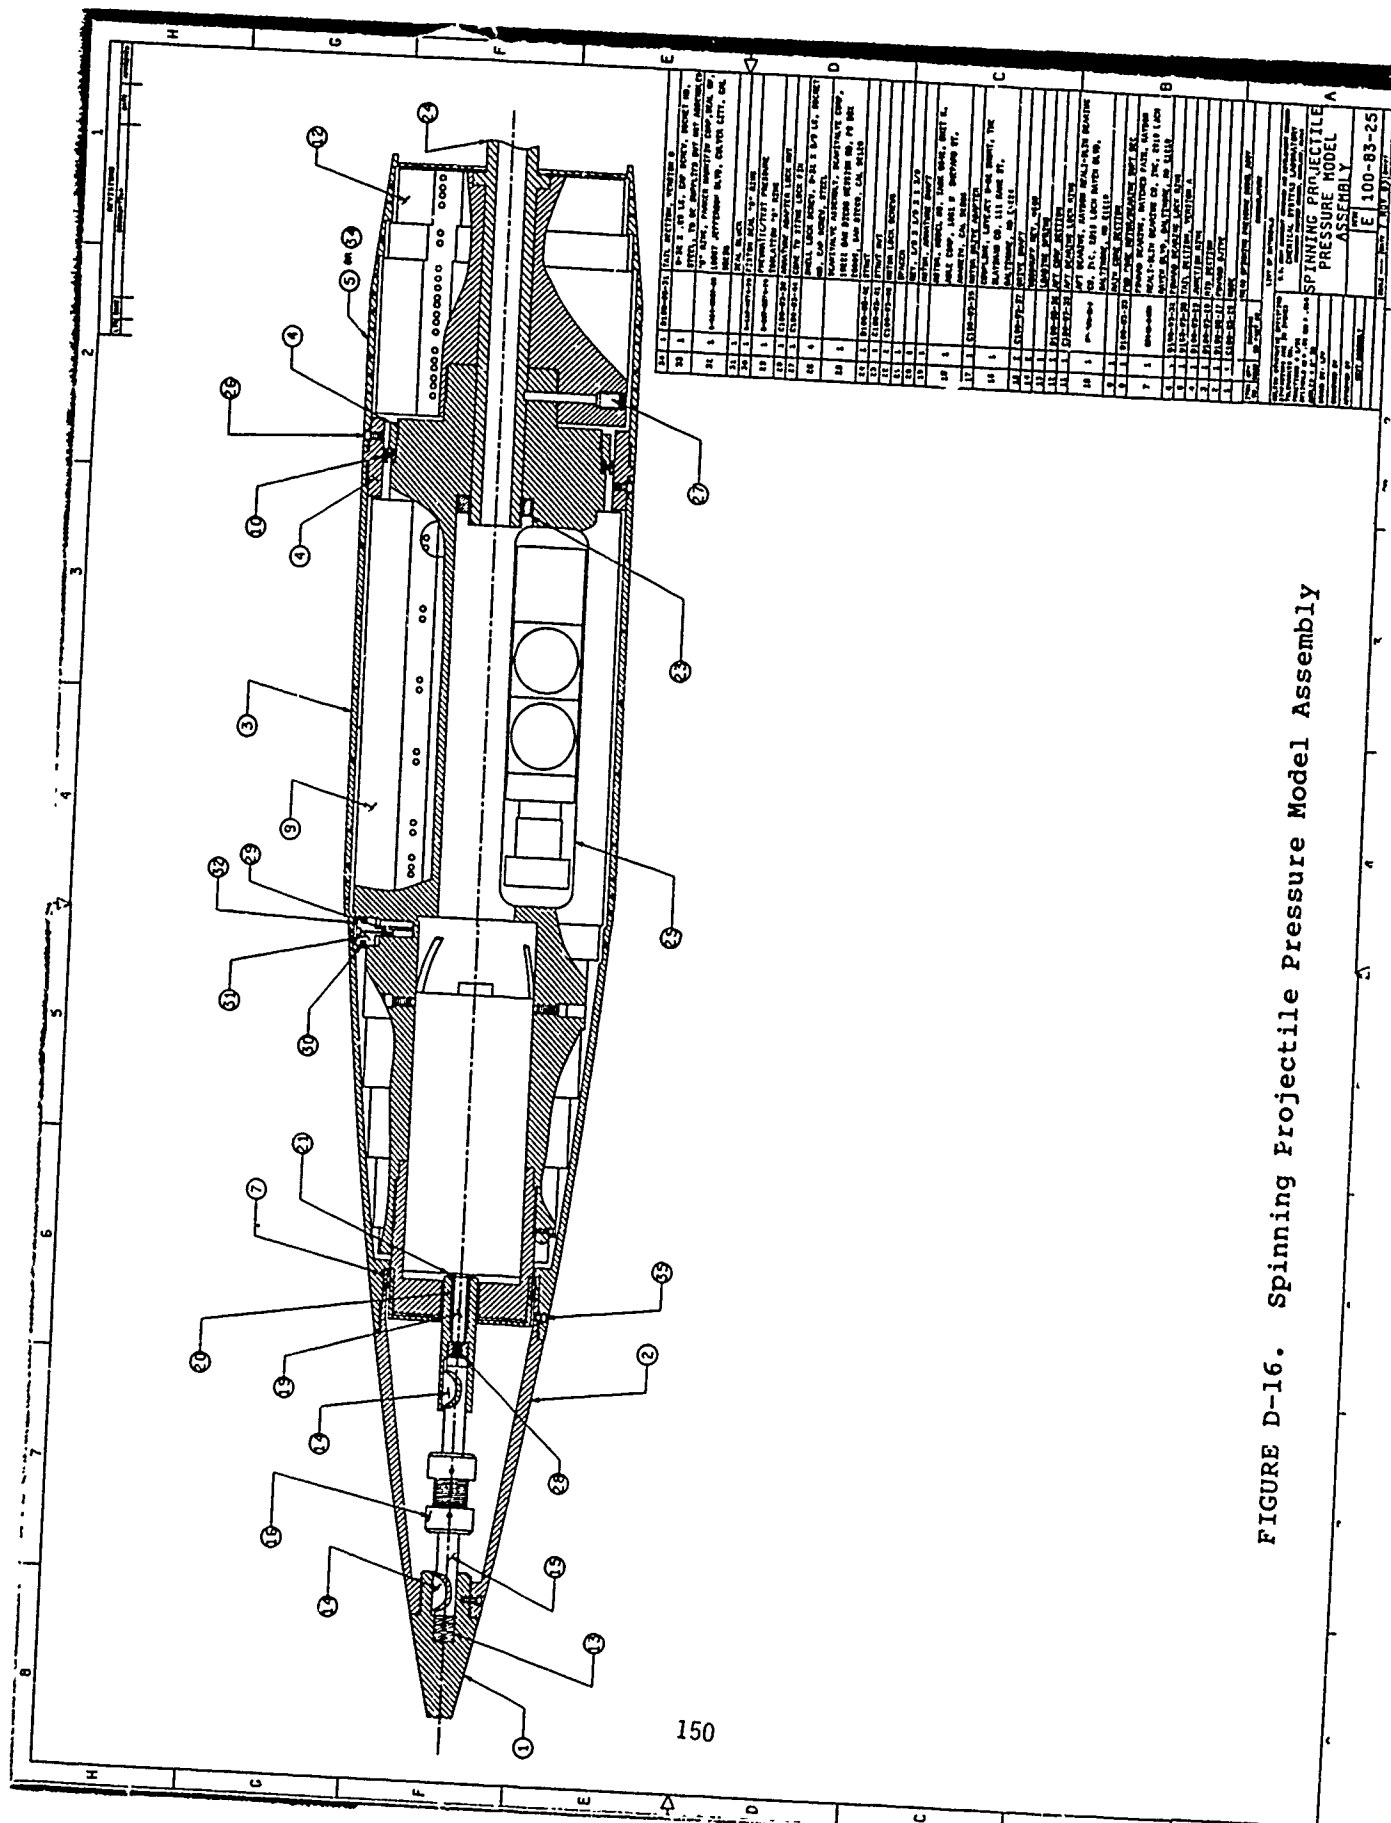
Spinning Projectile Pressure Model Assembly
